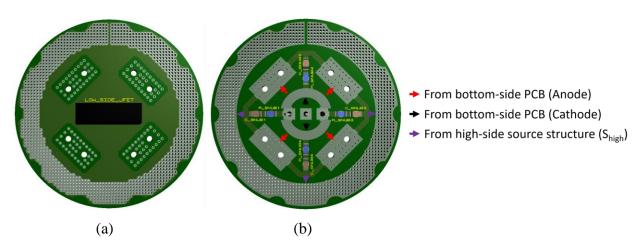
(a) Top and (b) bottom side views of top-side PCB
